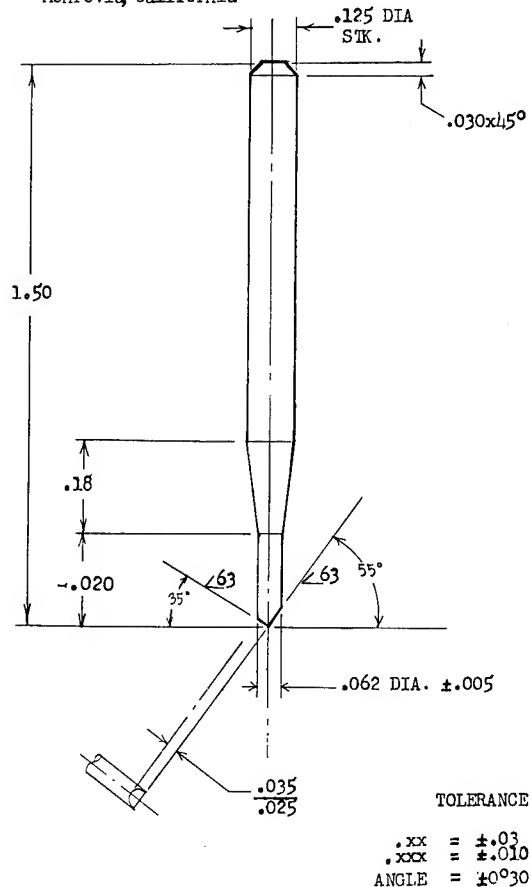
Copper alloy welding tip electrode.
